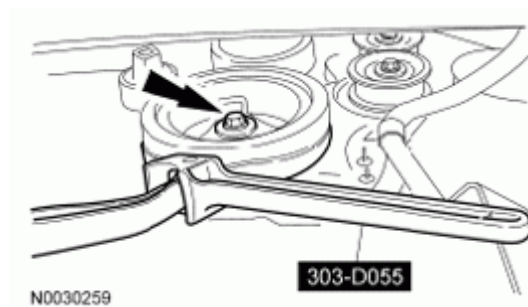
Holding Crankshaft Pulley Using Strap Wrench
